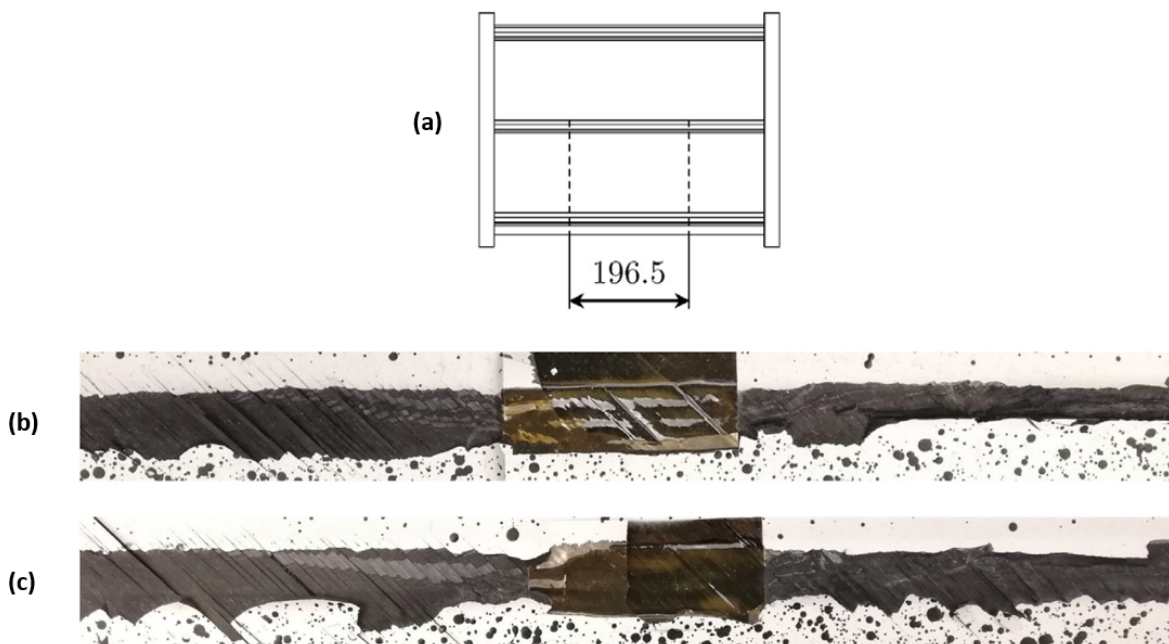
Top view of skin-stringer interface: (a) Area of Interest; (b) Test Panel 1 - fracture surface; (c) Test Panel 2 - fracture surface
